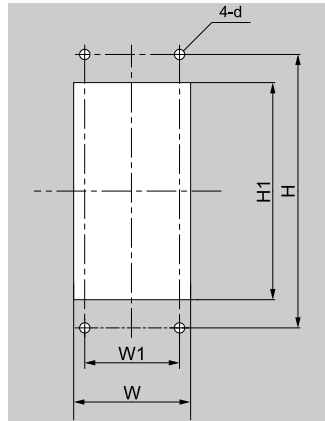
Panel Cut-Out Dimensions for Mounting to Interior of Control Panel
